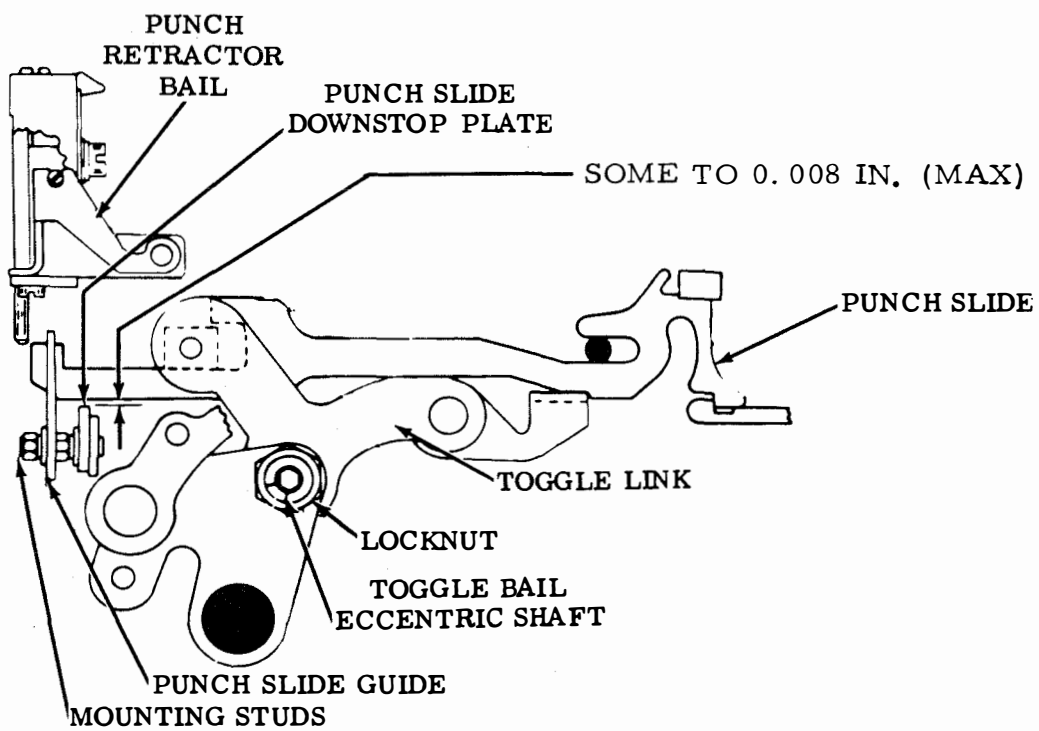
Punch Slide Downstop Plate Position (For Chadless Tape), Front View
